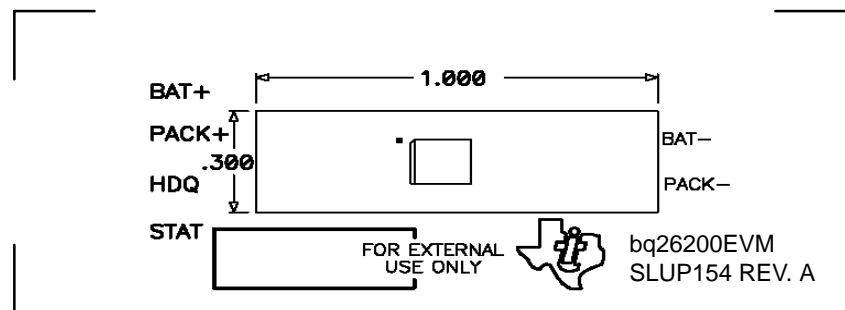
shows the PCB layers and assembly drawing for the circuit module.
